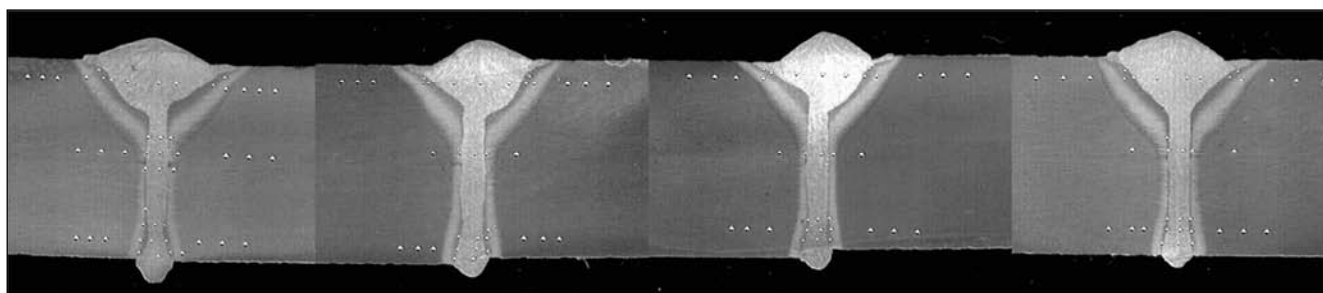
The effect laser beam on weld bead geometry: a) 10 kW, b) 11.5kW, c)12.4 kW, d)13 kW
